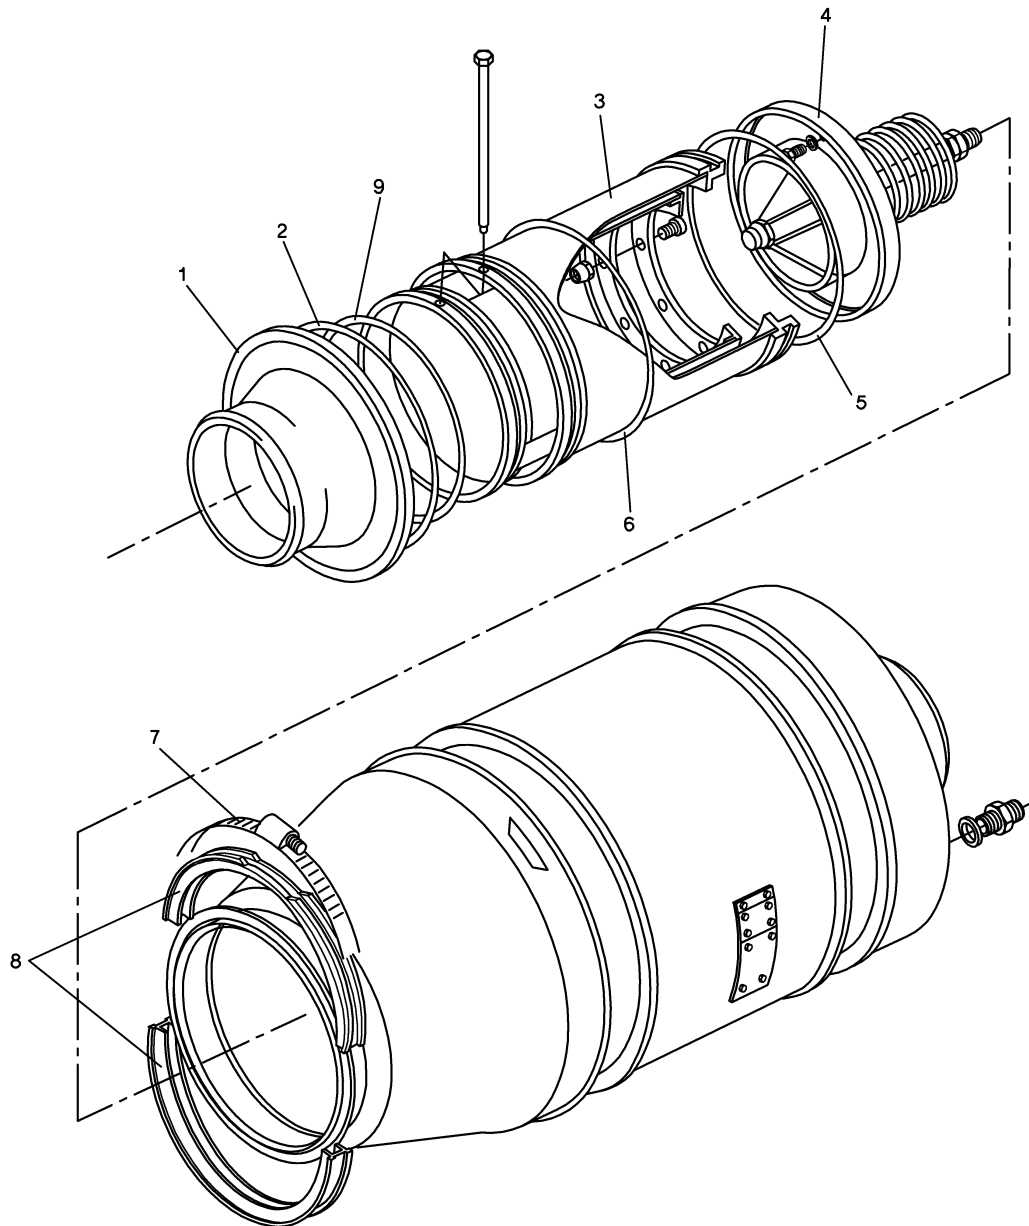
REMOVAL - INSPECTION - INSTALLATION OF COALESCER
